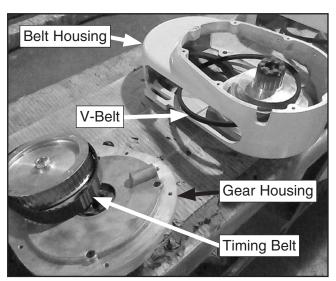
Once gear housing is separated from belt housing, both belts can be accessed.
